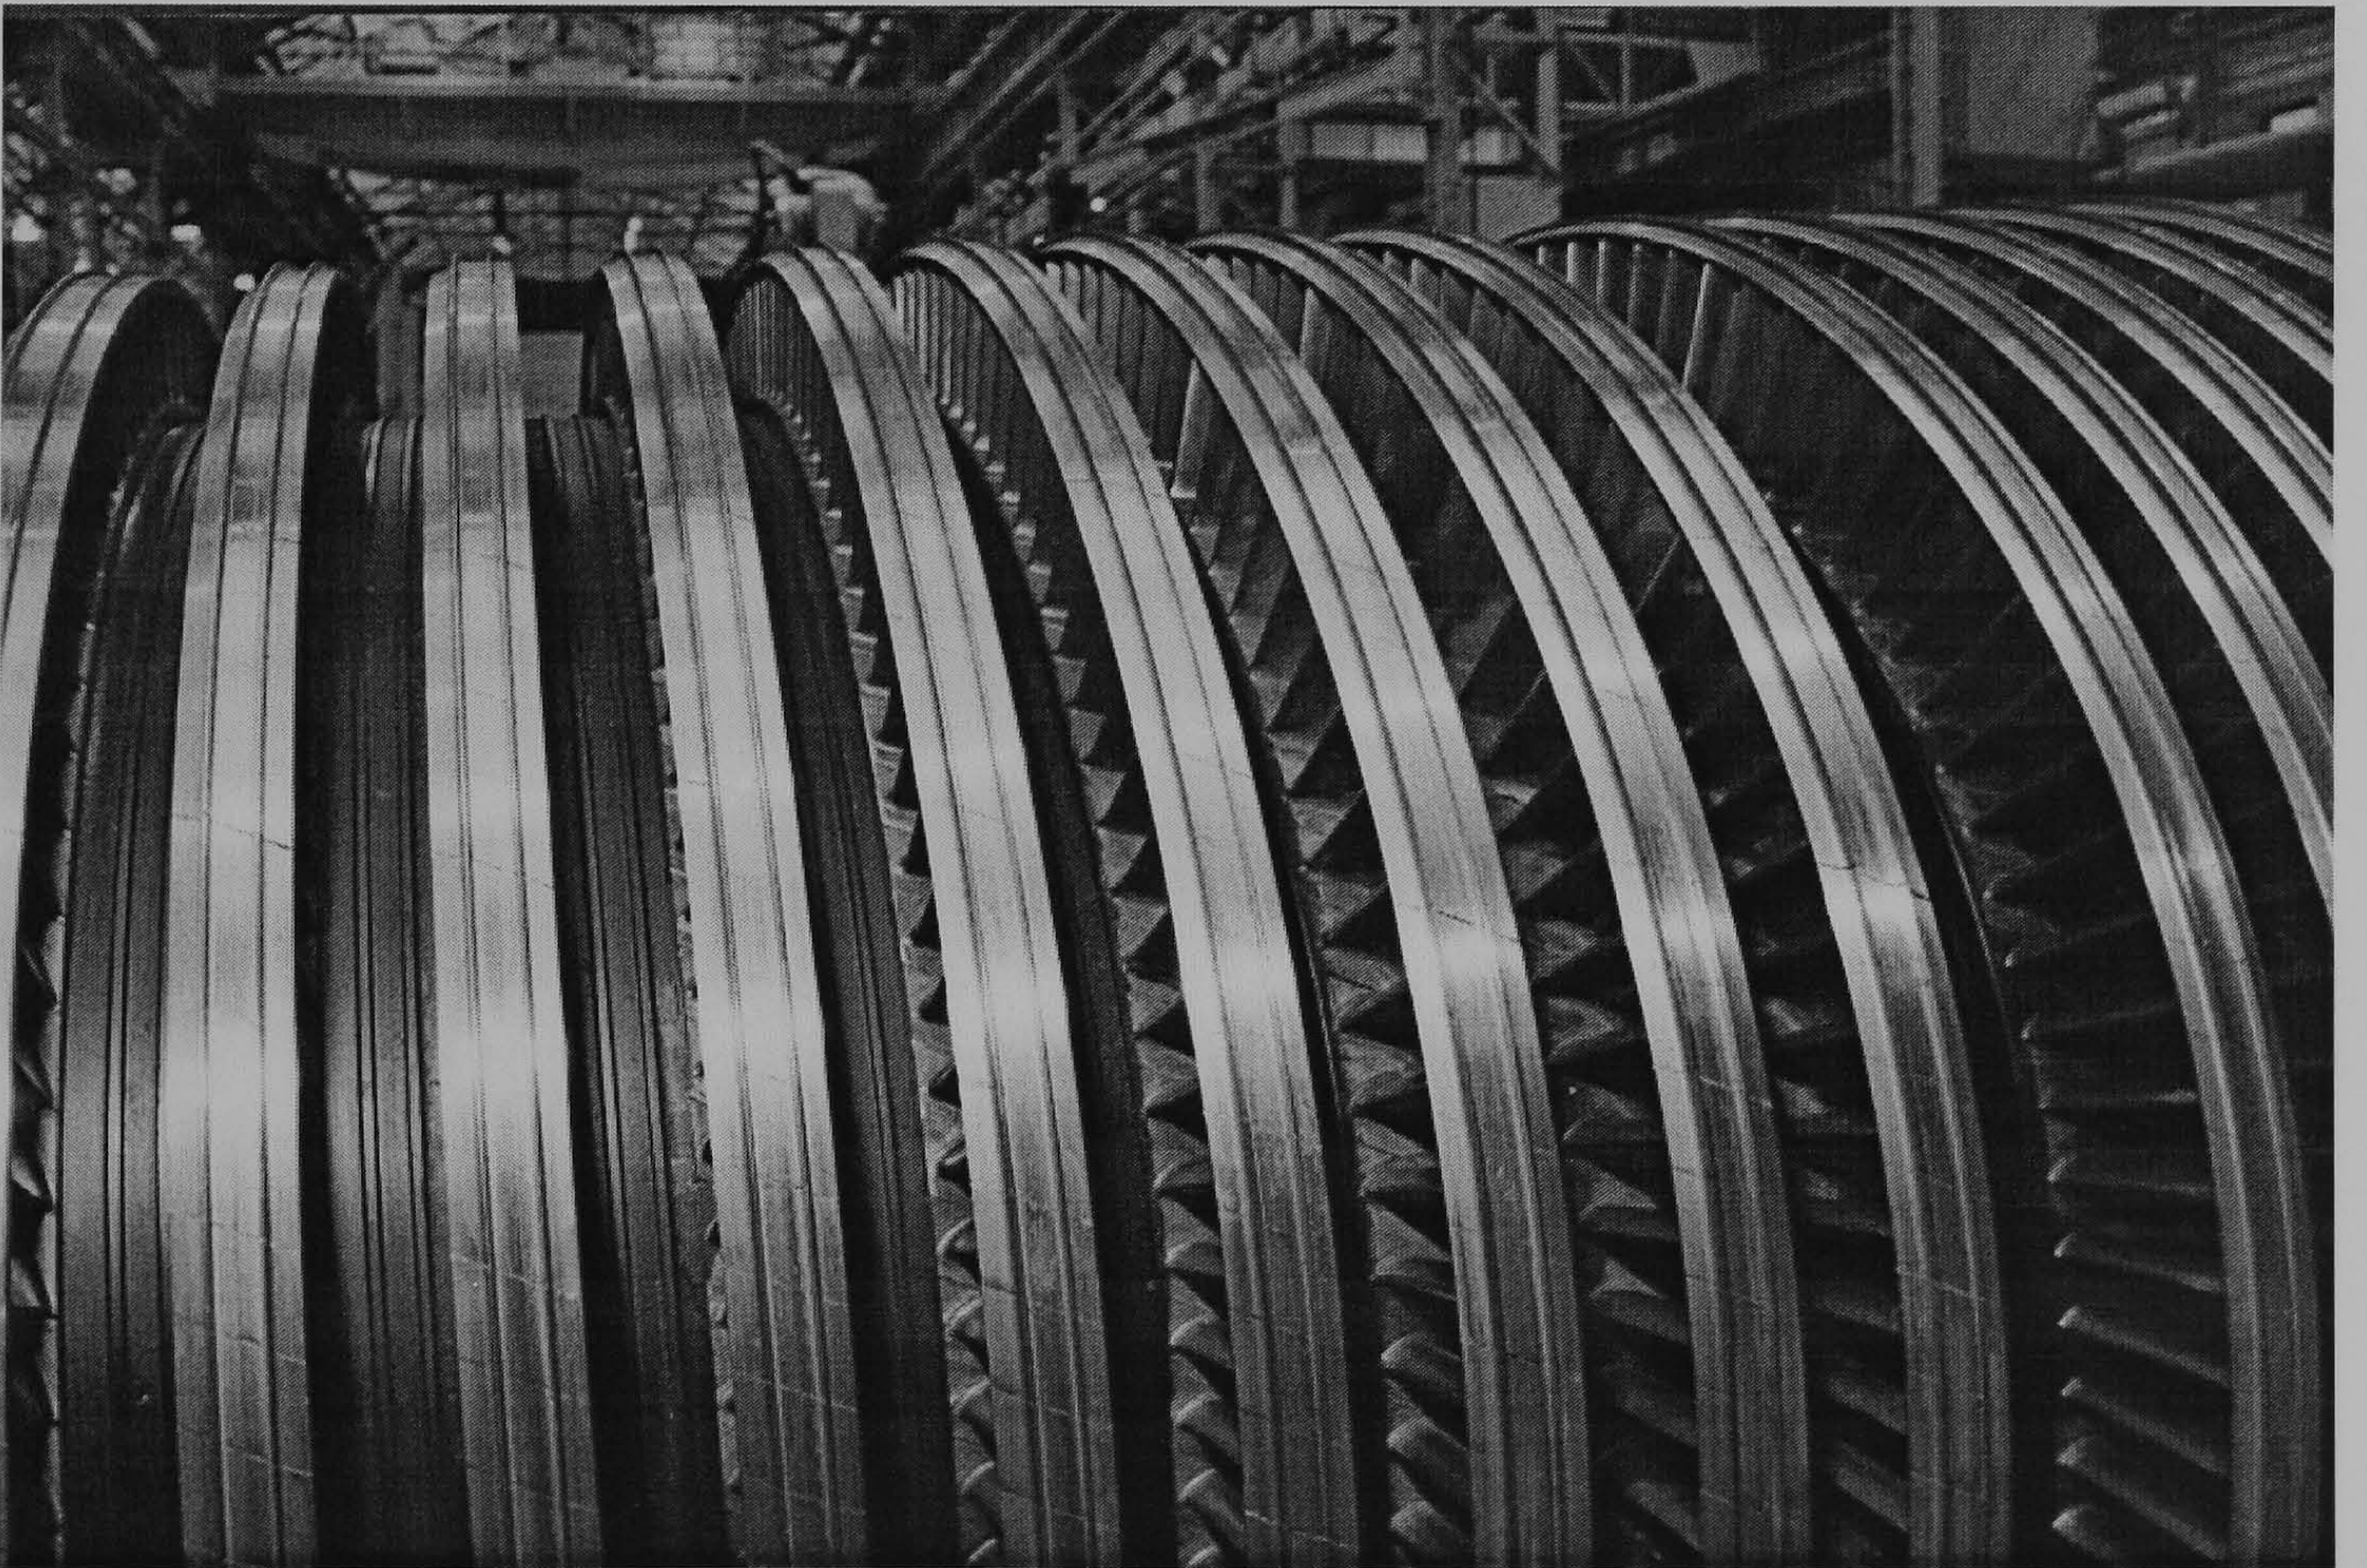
Turbine rotor shaft showing rows of rotating blades and labyrinth fins on the shaft and blade tips.
